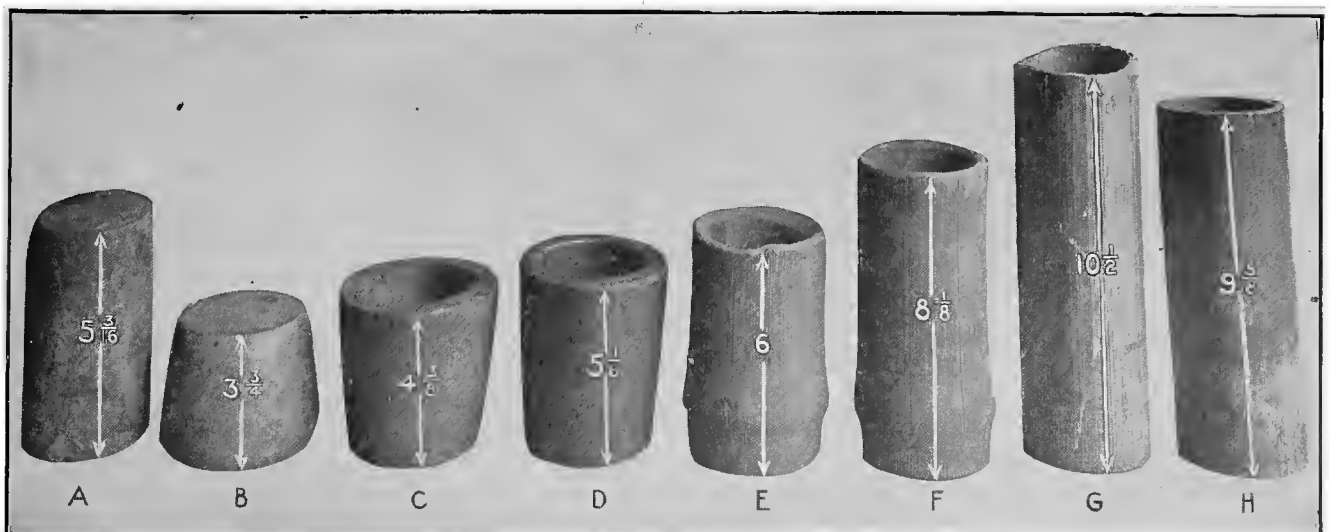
FROM THE BLANK TO THE TRIMMED SHELL
